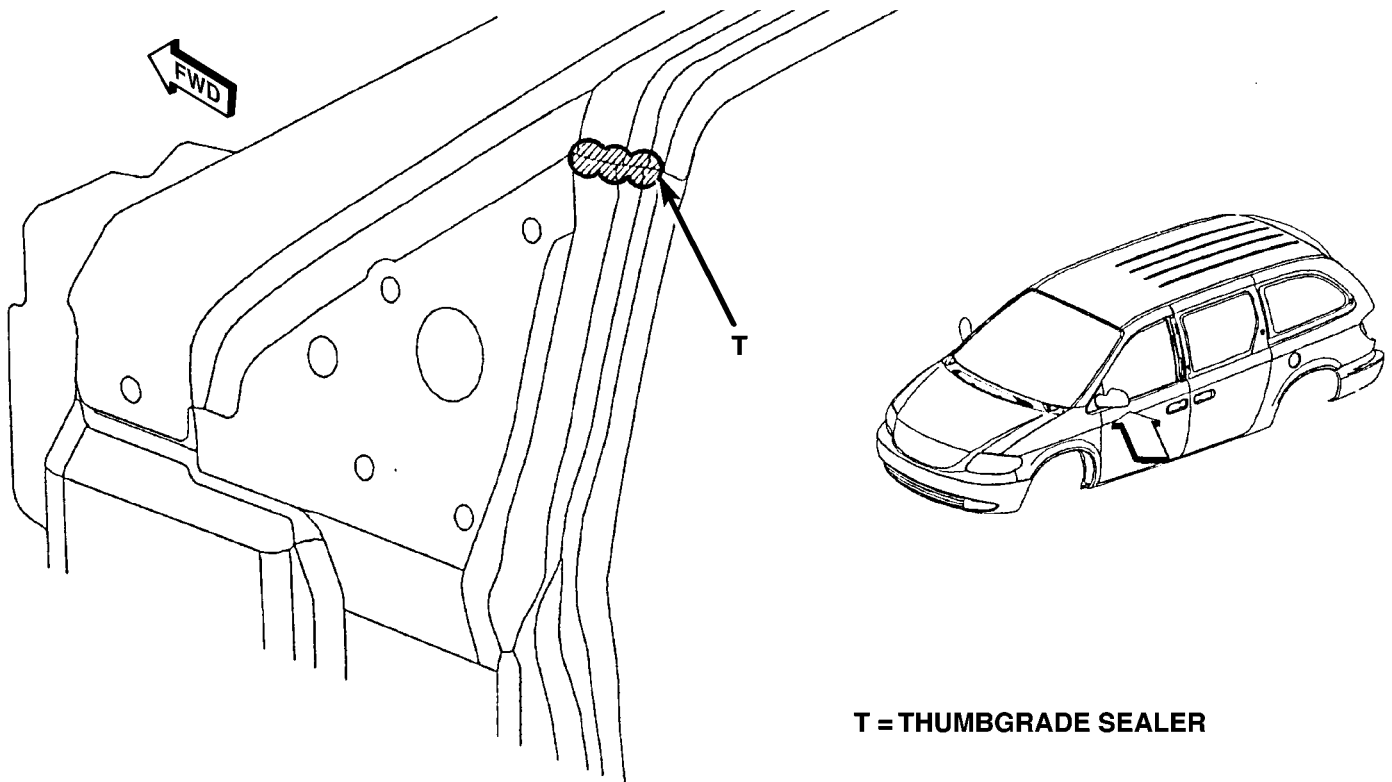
SIDE QUARTER WINDSHIELD OPENING - LEFT AND RIGHT SIDES
